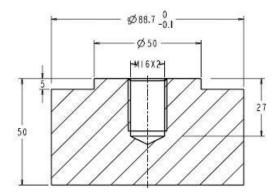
Technical Drawing of the Interchangeable Component of Upper Blanking Die
